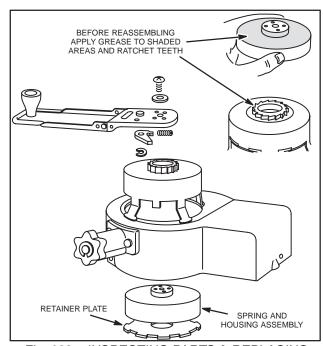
INSPECTING PARTS & REPLACING SPRING CUP
